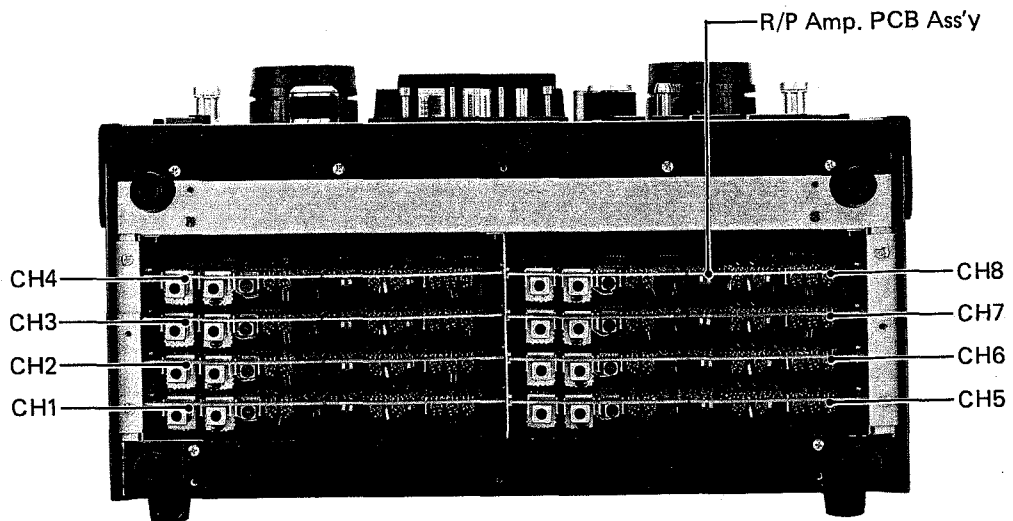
WITH THE BOTTOM PANEL REMOVED
